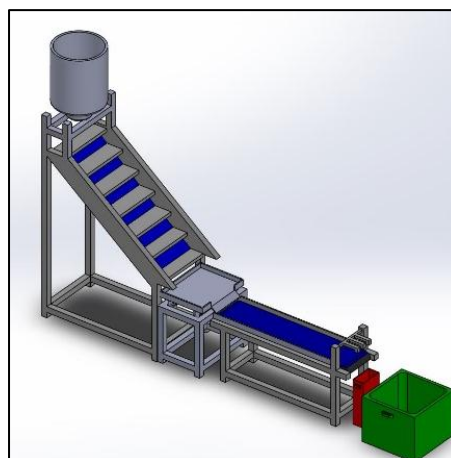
Final Design of Pepper Sorting Machine with Ejector Stand
